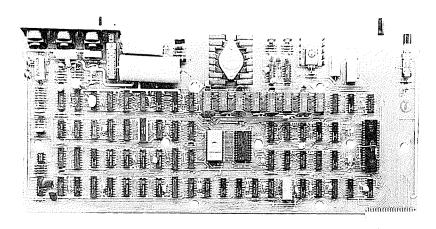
Circuit board layout for TRS-80 Model I.
